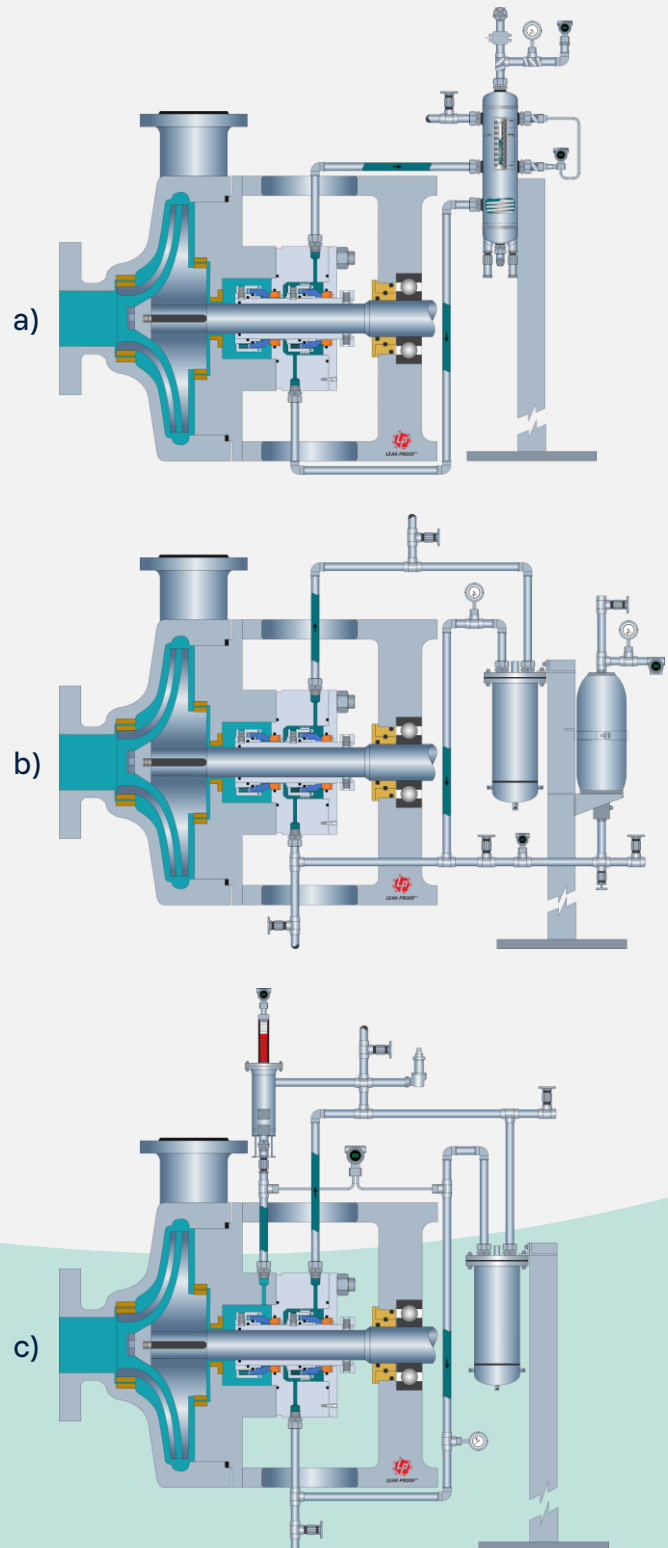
a) Plan 53A, b) Plan 53B, c) Plan 53C
